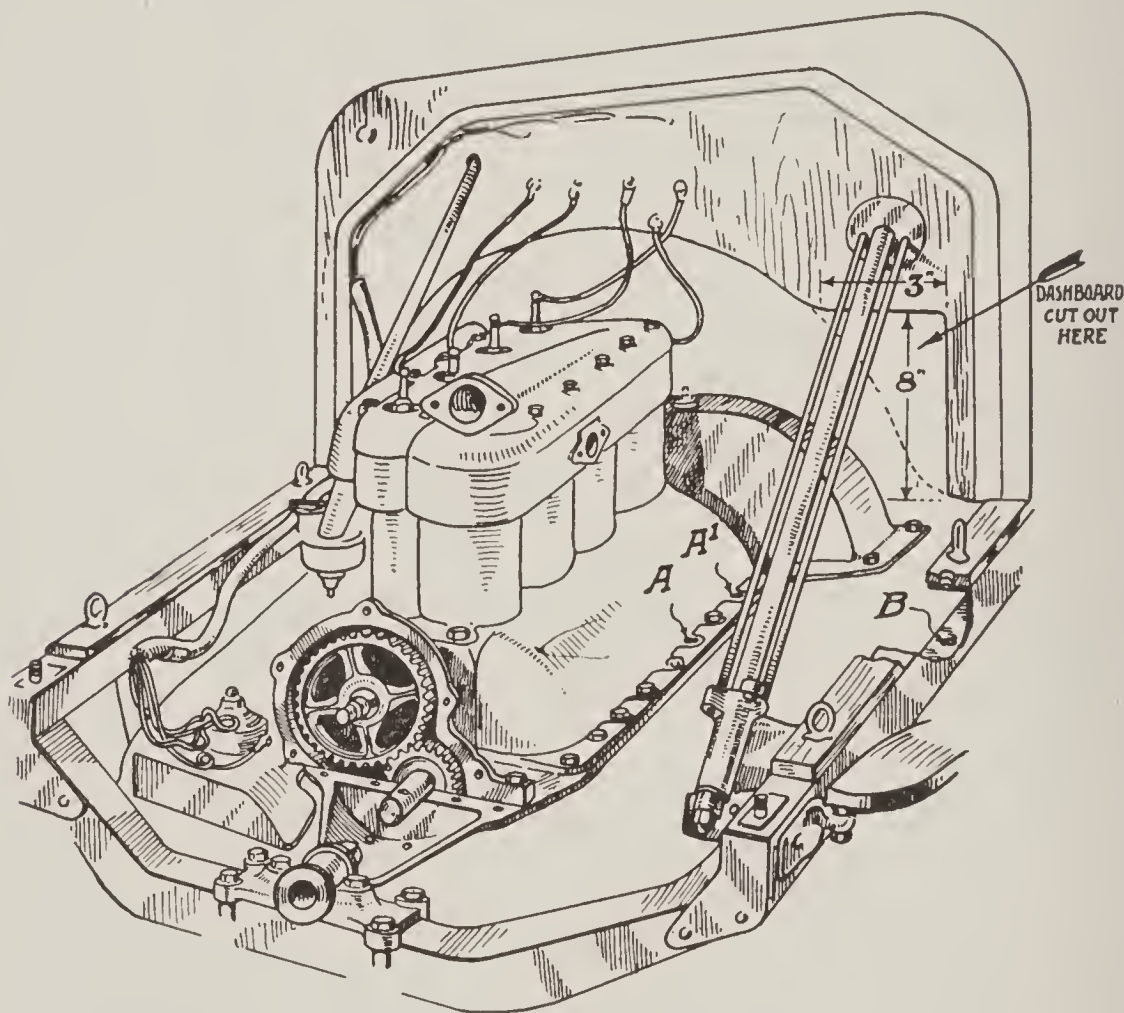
Ford Frame Stripped for Mounting Shaft-Driven Genemotor
